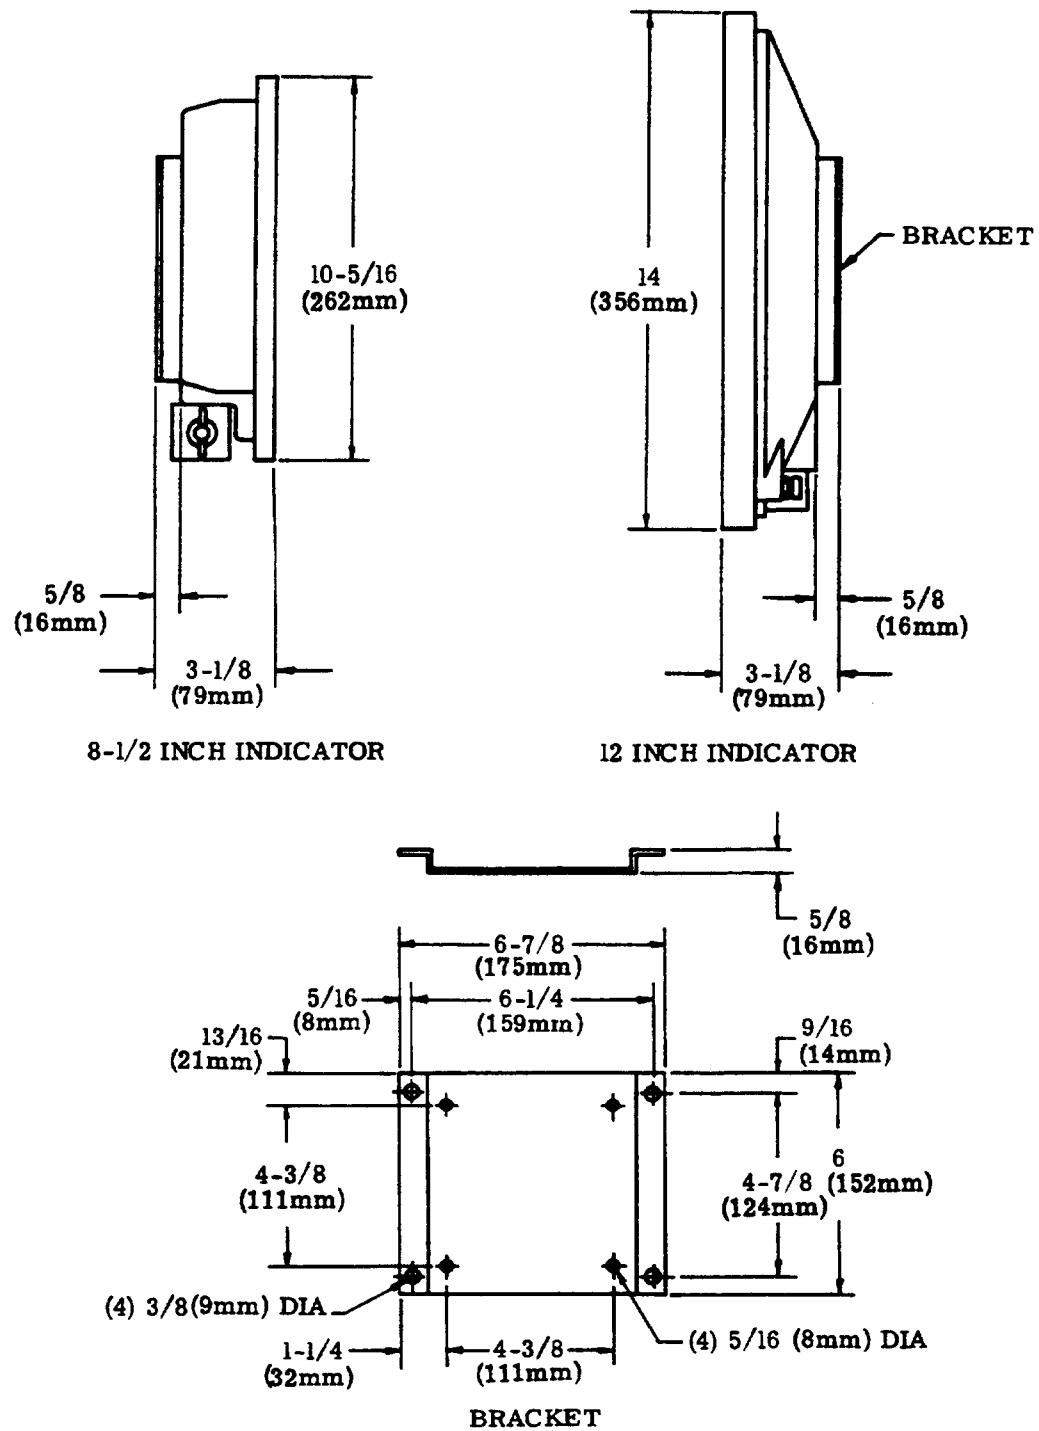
Overall Dimensions for 8-1/2 and 12 Inch Indicator and Bracket Installation
